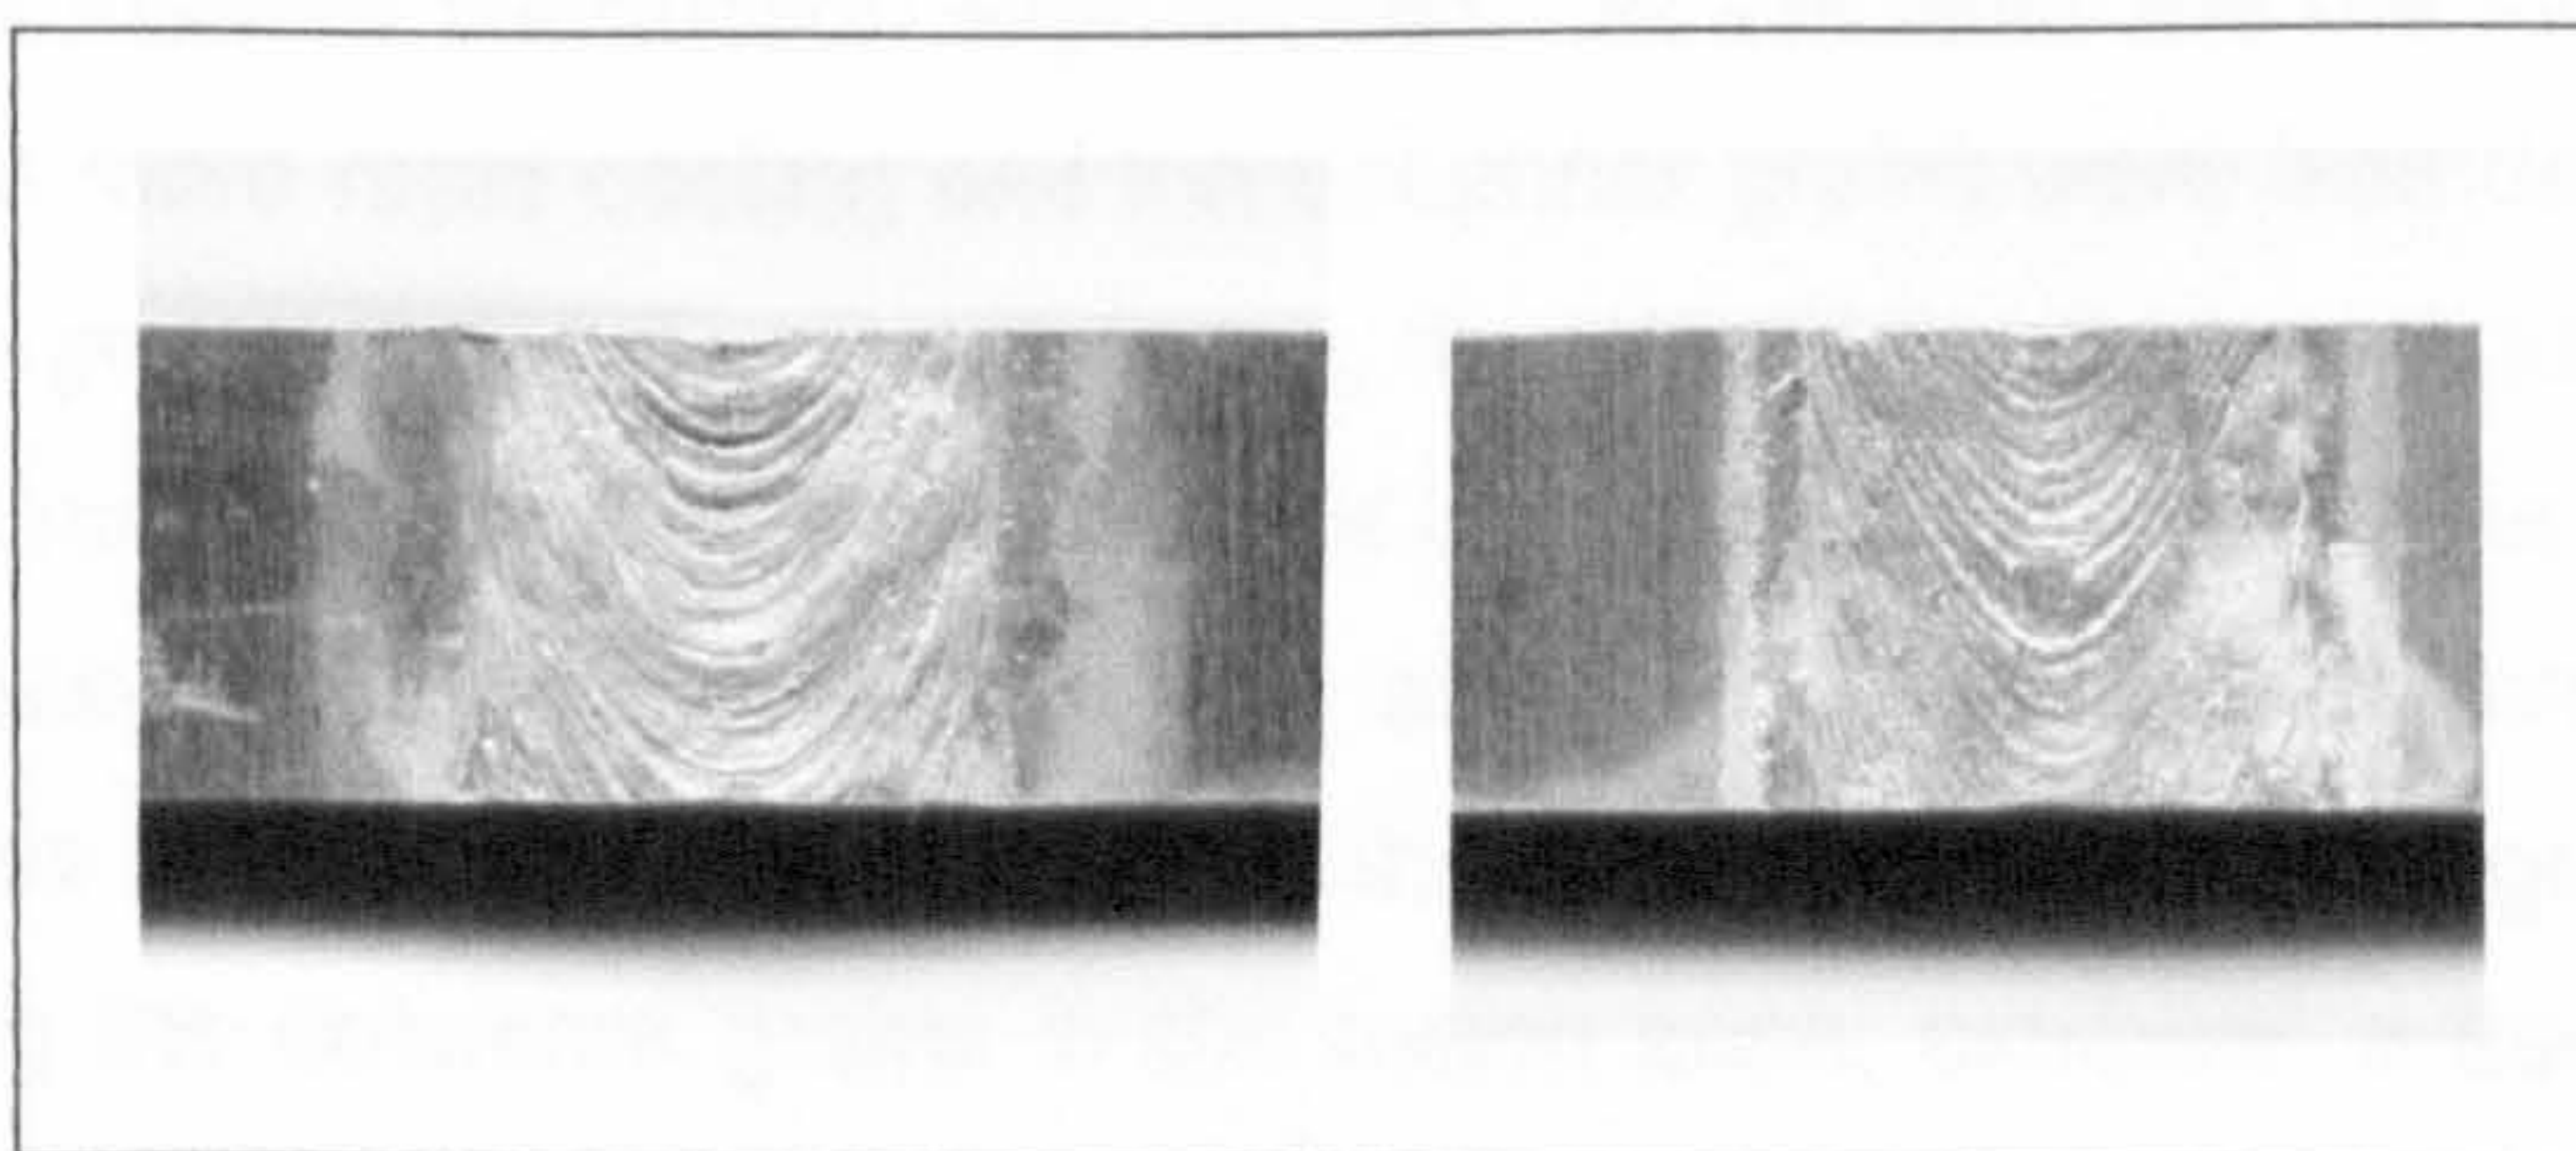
MIG LI weld beads, 1st run left, 2nd run right.
